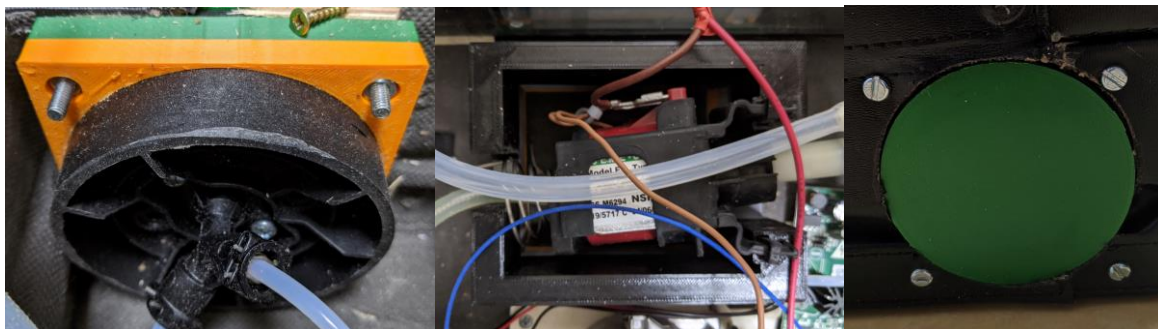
, Printed Parts: Grouphead Holder, Grouphead Cover, Pump Holder.
